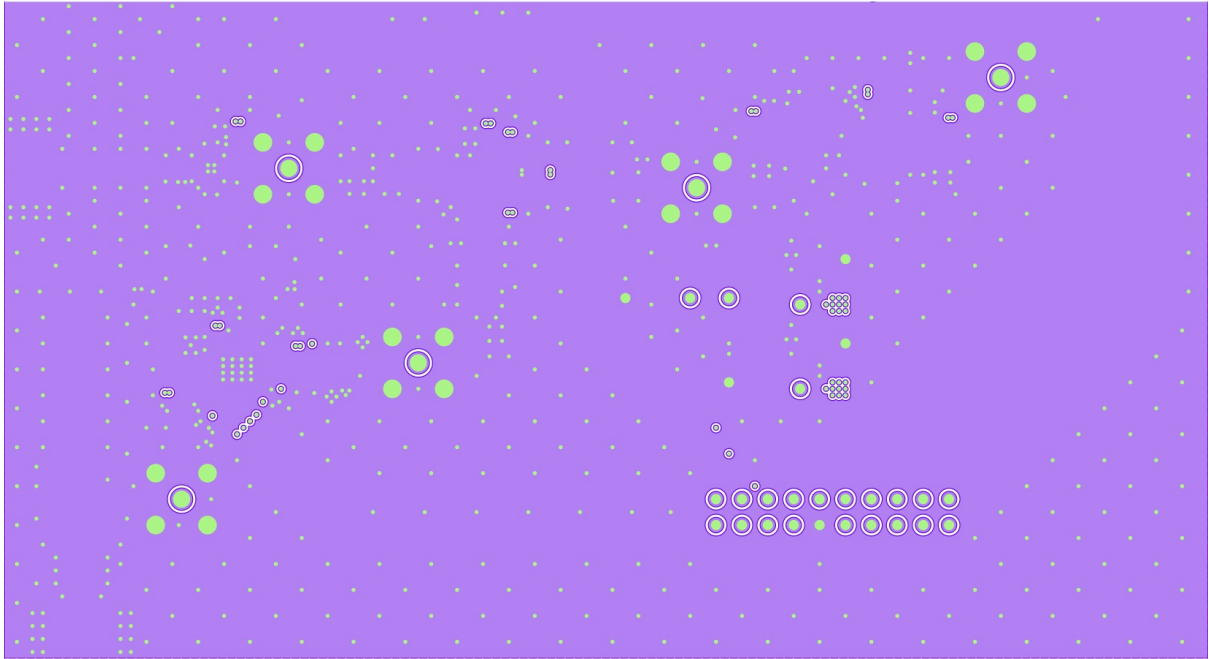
DLL-HPC received signal beamformer PCB layout for element 0 inner layer 4
